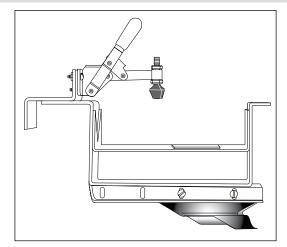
New tool with slotted screw holes, heavy gauge metal
